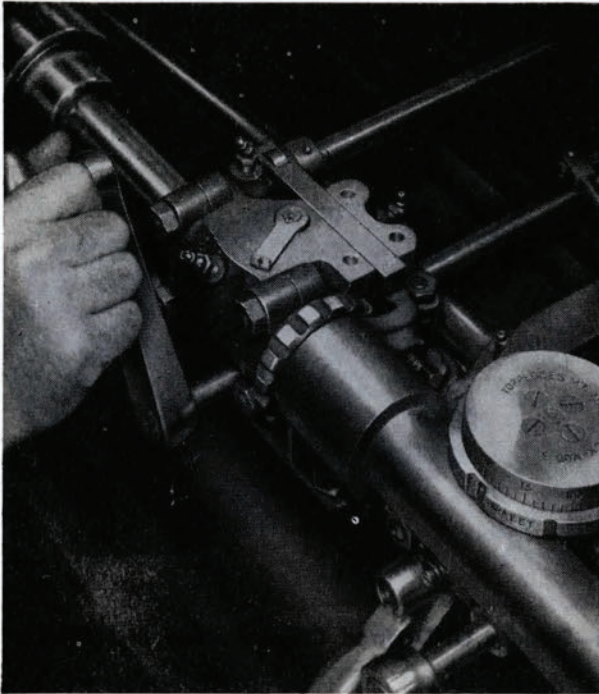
Simple Type Speed Setting Mechanism Being Set to HIGH Speed Position.
